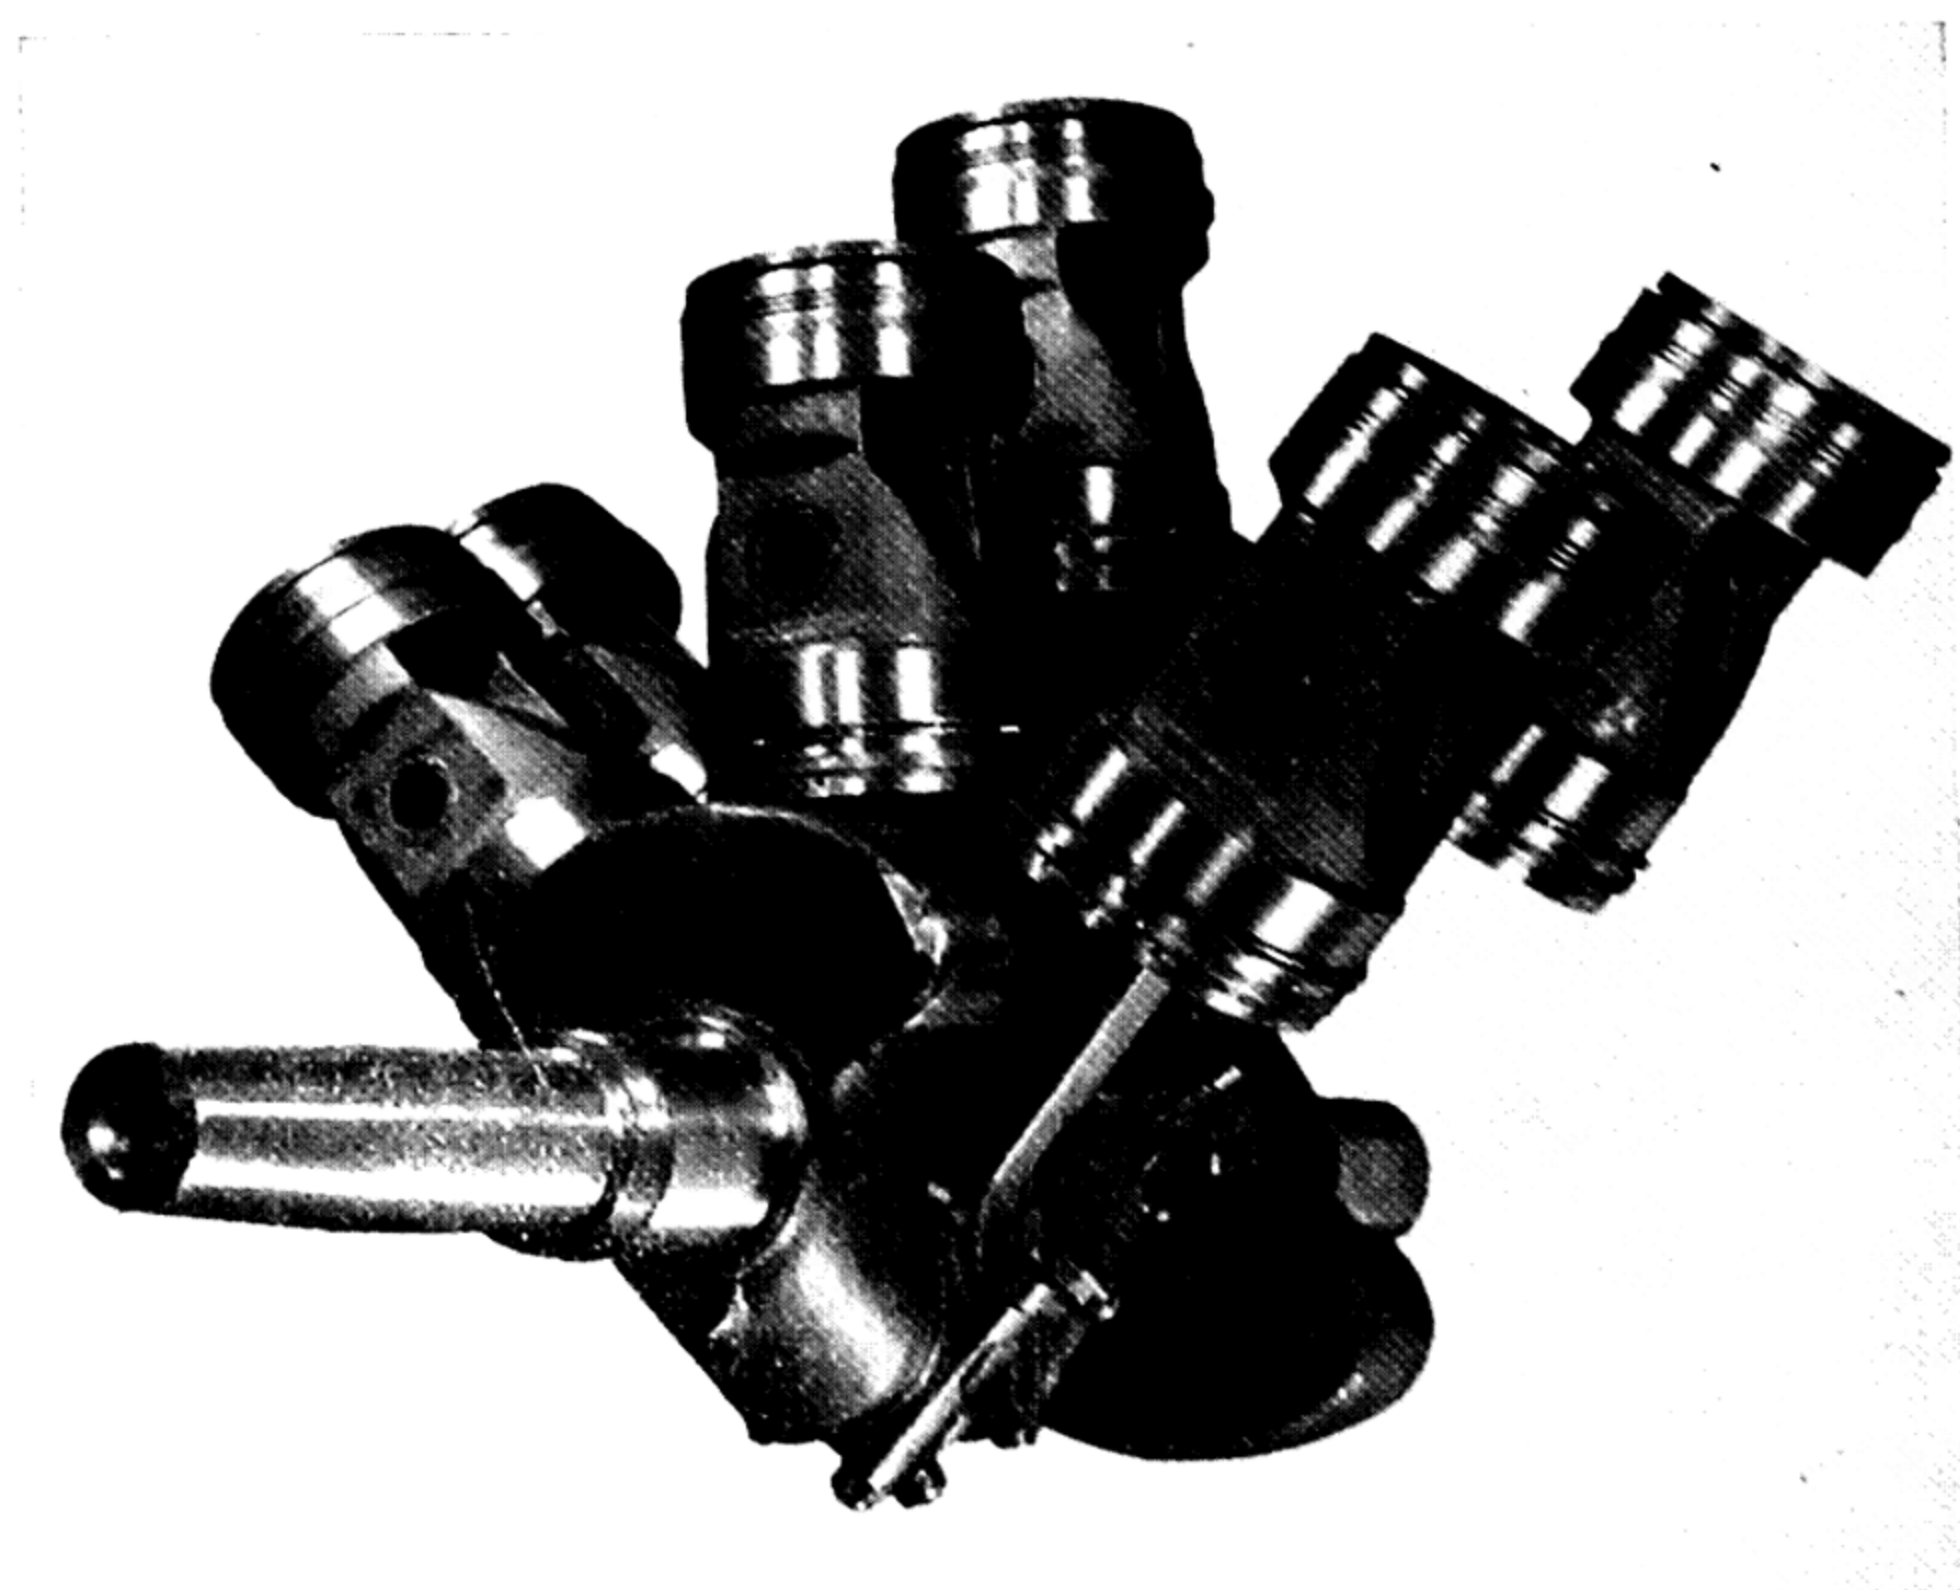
Piston arrangement for *W* design. Courtesy York Corp., York, Penna.
